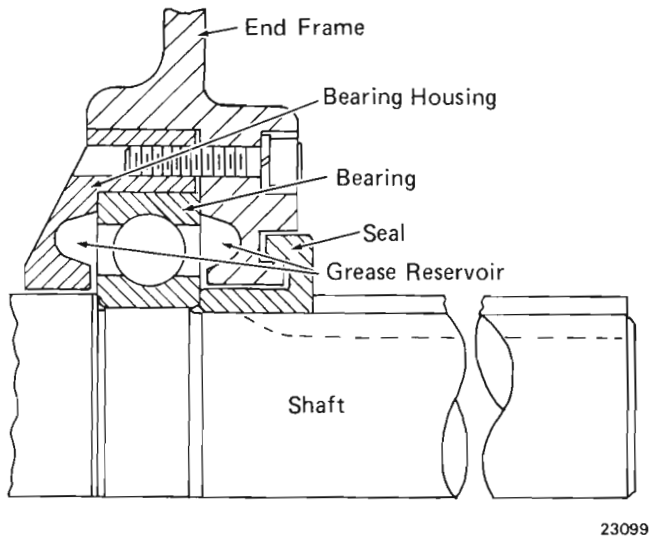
B - Newer Style (Open) Bearing Assembly, Cross-Section
